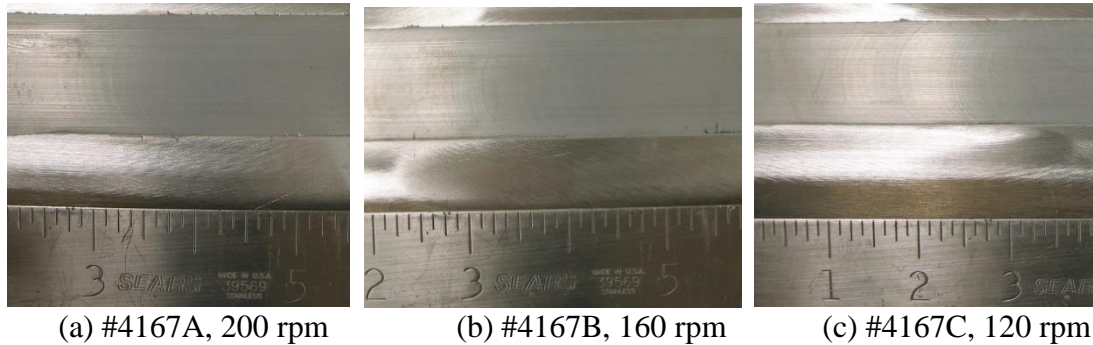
Joint surfaces of SSSP: T+3CT pin, 51 mm/min, Fz 69 KN, 1° tilt
